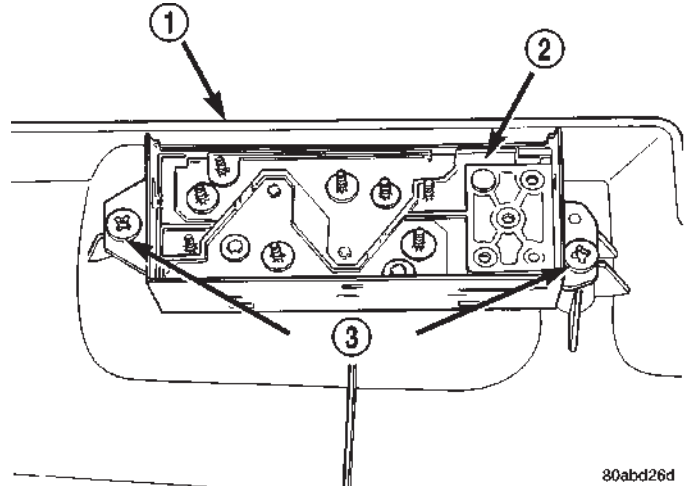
Power Seat Switch Remove/Install - Extended Cab
